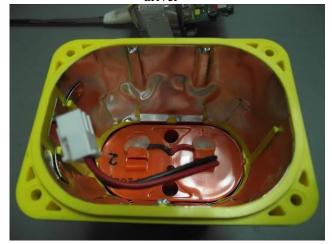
Remove the lid assembly by lifting it vertically away from the main body
